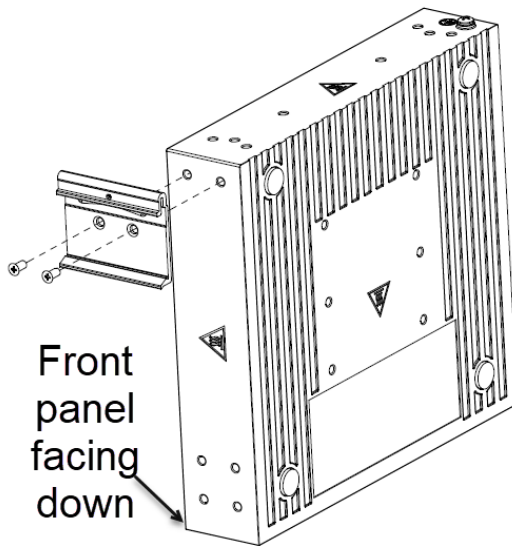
Din Rail Mounting Option 2: Attach the Bracket
